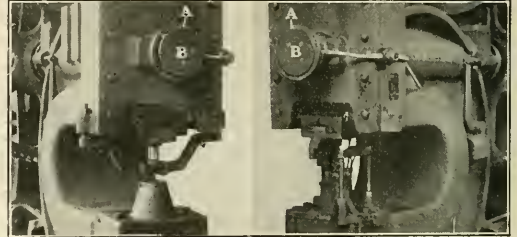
Control Head in Adjusting Position on Punching Machine (Right) Shearing Machine with Control Head in Operating Position
